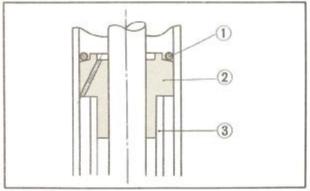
(1) O-ring (2) Rod guide (3) Cylinder
